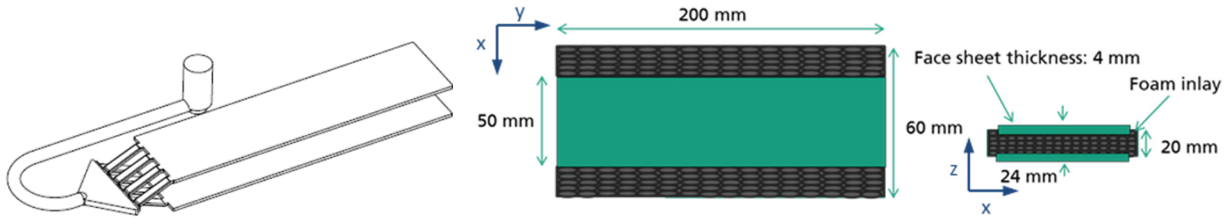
Schematic drawing of the mold cavity (left), final specimen geometry (right).
